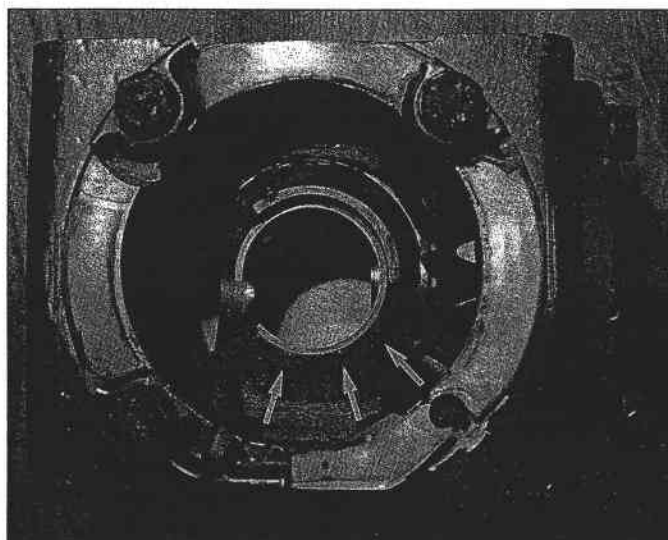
Accident gear box - fractured input inboard bearing support. Arrows indicate typical fracture surface.
